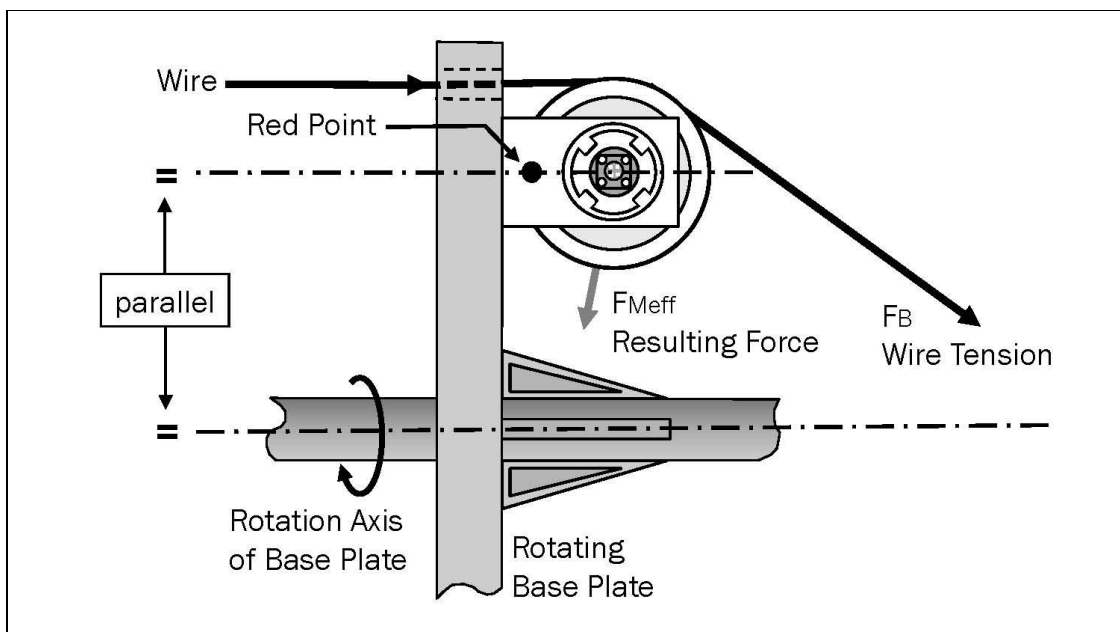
RMGZ 400B / 600B Red Point alignment on rotating machines R800004d
